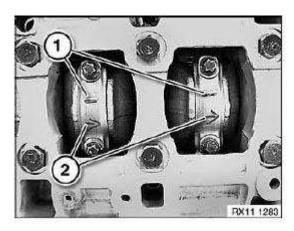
Identifying Camshaft Bearing Positions Courtesy of BMW OF NORTH AMERICA, INC.
